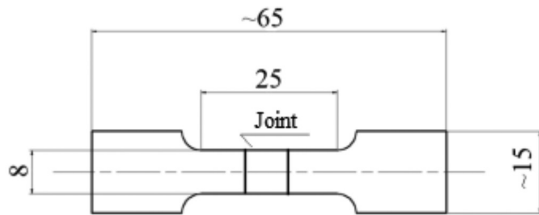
The technical drawing of specimen for tensile testing cut from base material
